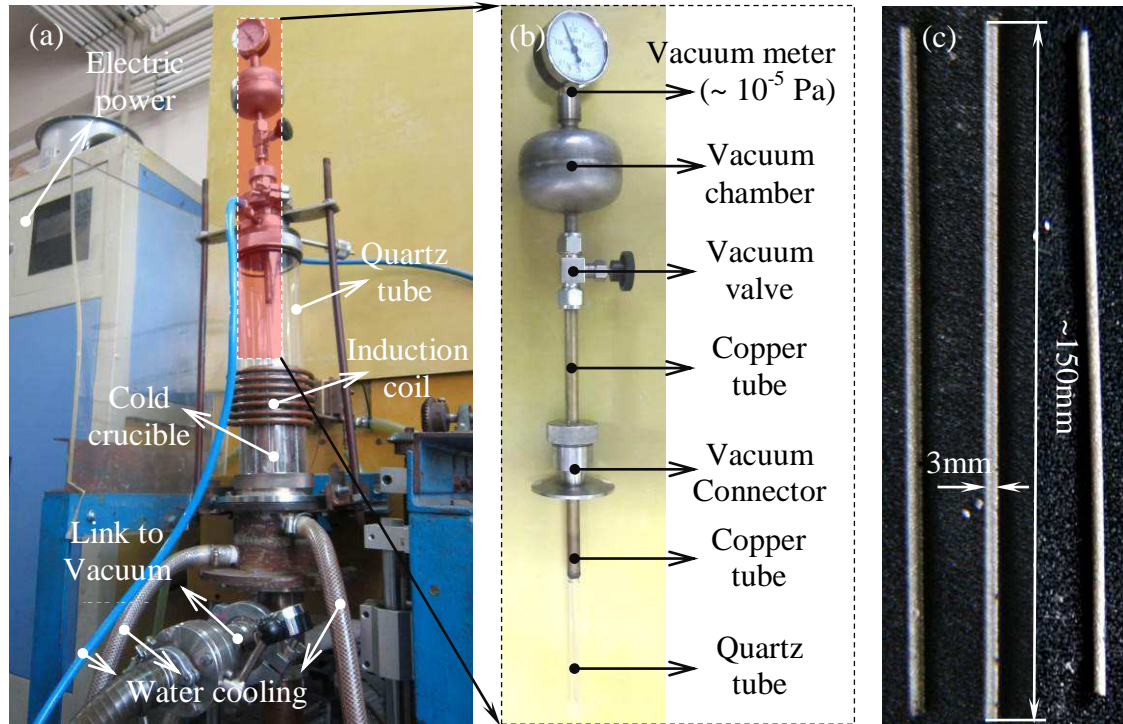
(a) Cold crucible electromagnetic induction furnace used to melt master alloys; (b) Vacuum suction casting system used to prepare prefabricated specimens; (c) The prefabricated specimens and their dimensions.
